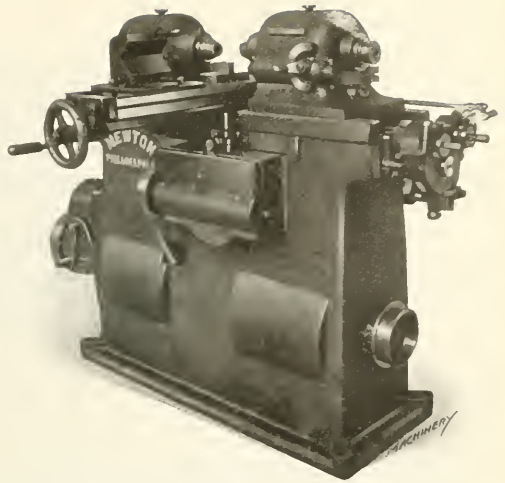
Duplex Keyseating Machine built by Newton Machine Tool Works
